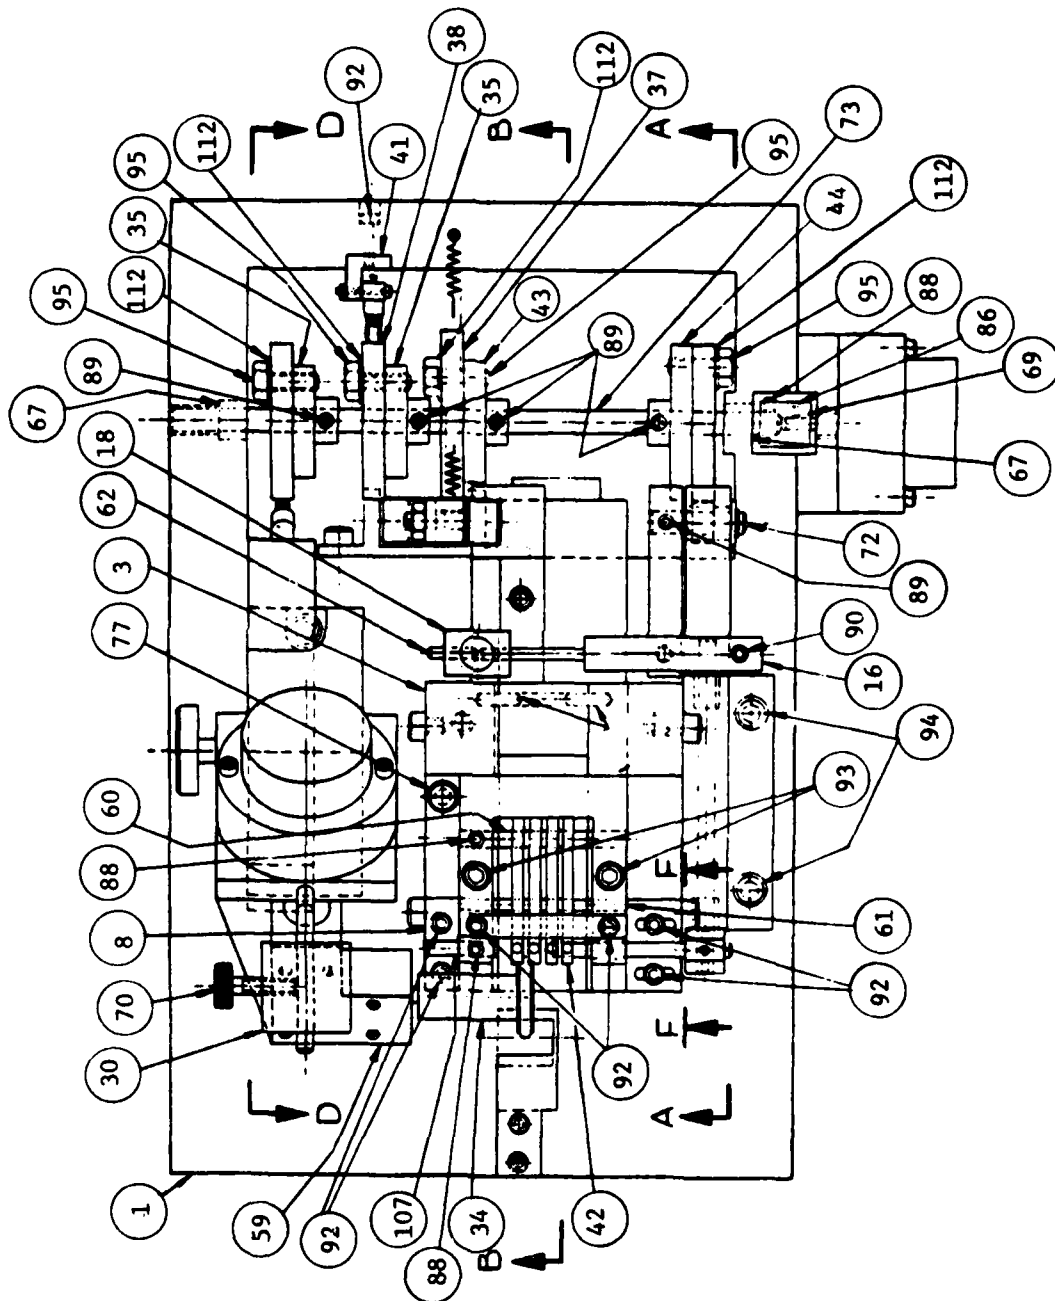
Axial/Radial Module of the Automatic Roller Inspection System
